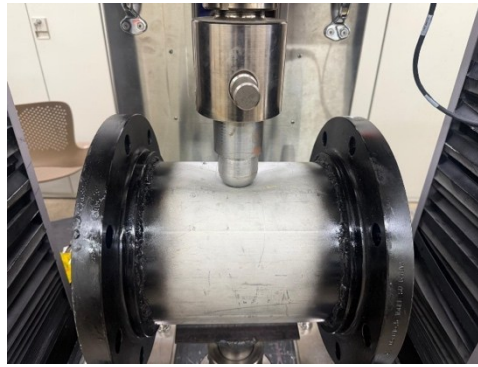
Picture showing the machining of dent in a stainless-steel pipe segment using the MTS machine.
